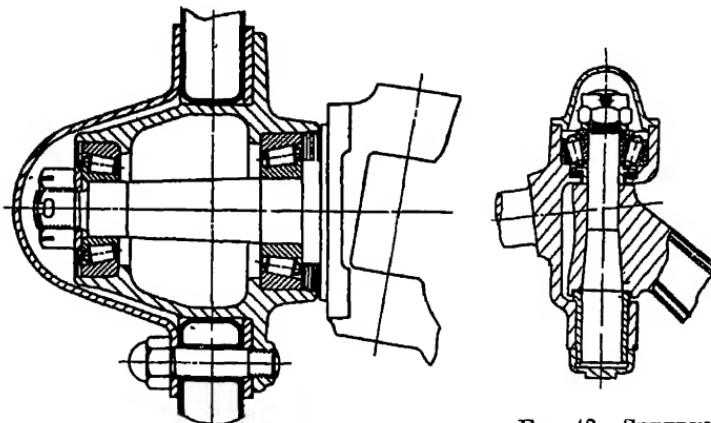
SKEFKO BEARINGS IN LIGHT CAR FRONT WHEEL HUB
